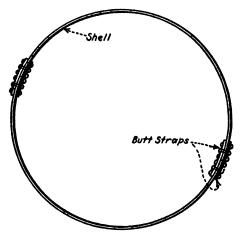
Section through Shell of Scotch Boiler Showing Butt Straps
